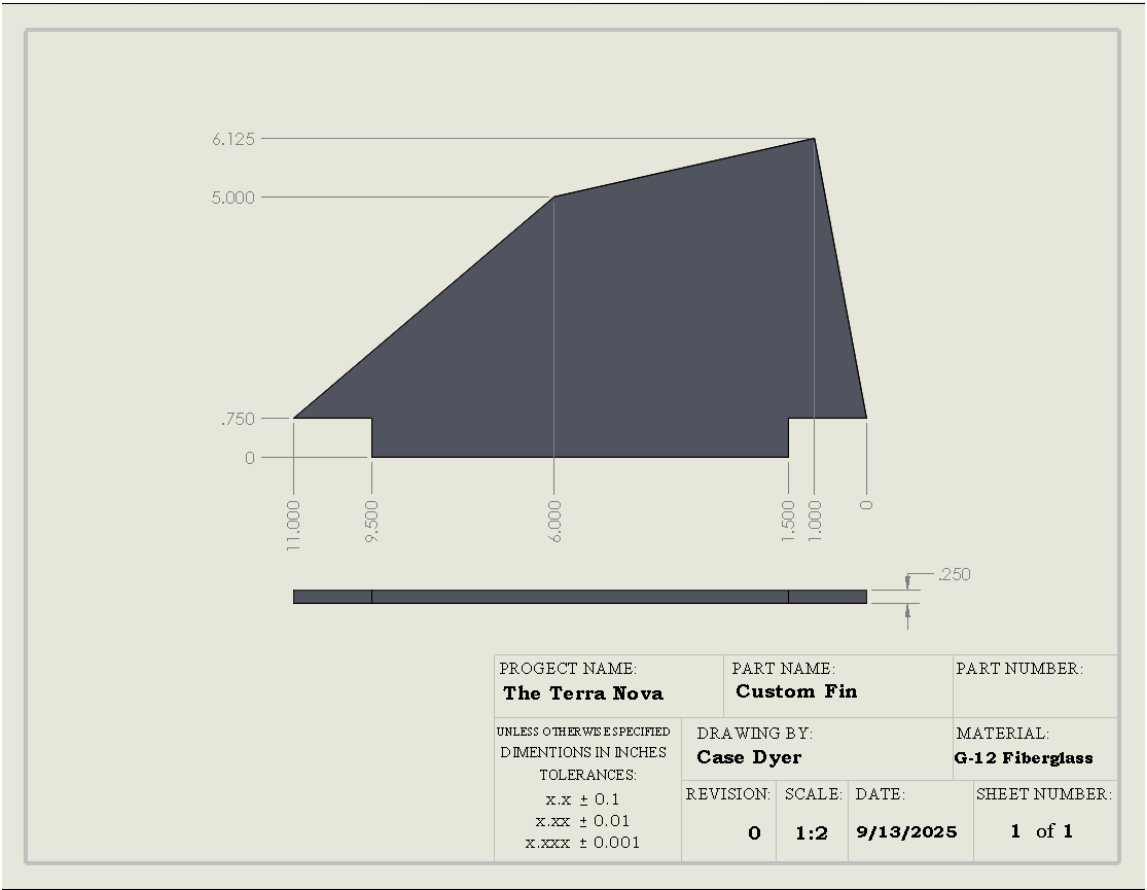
Fin Detail Drawing (designed in SOLIDWORKS)
